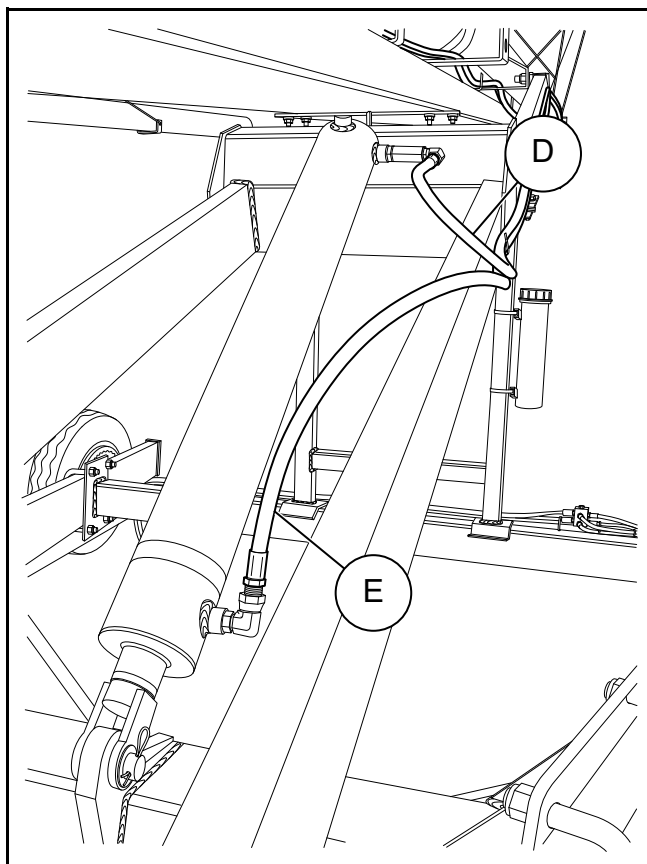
Conveyor Hydraulic Cylinder Hoses
